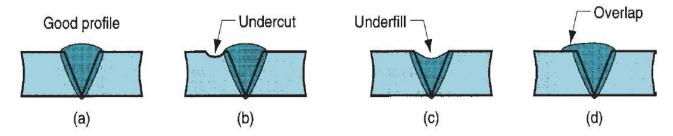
(a) Desired weld profile for single V-groove weld joint. Same joint but with several weld defects: (b) undercut, in which a portion of the base metal part is melted away; (c) underfill, a depression in the weld below the level of the adjacent base metal surface; and (d) overlap, in which the weld metal spills beyond the joint on to the surface of the base part but no fusion occurs.
